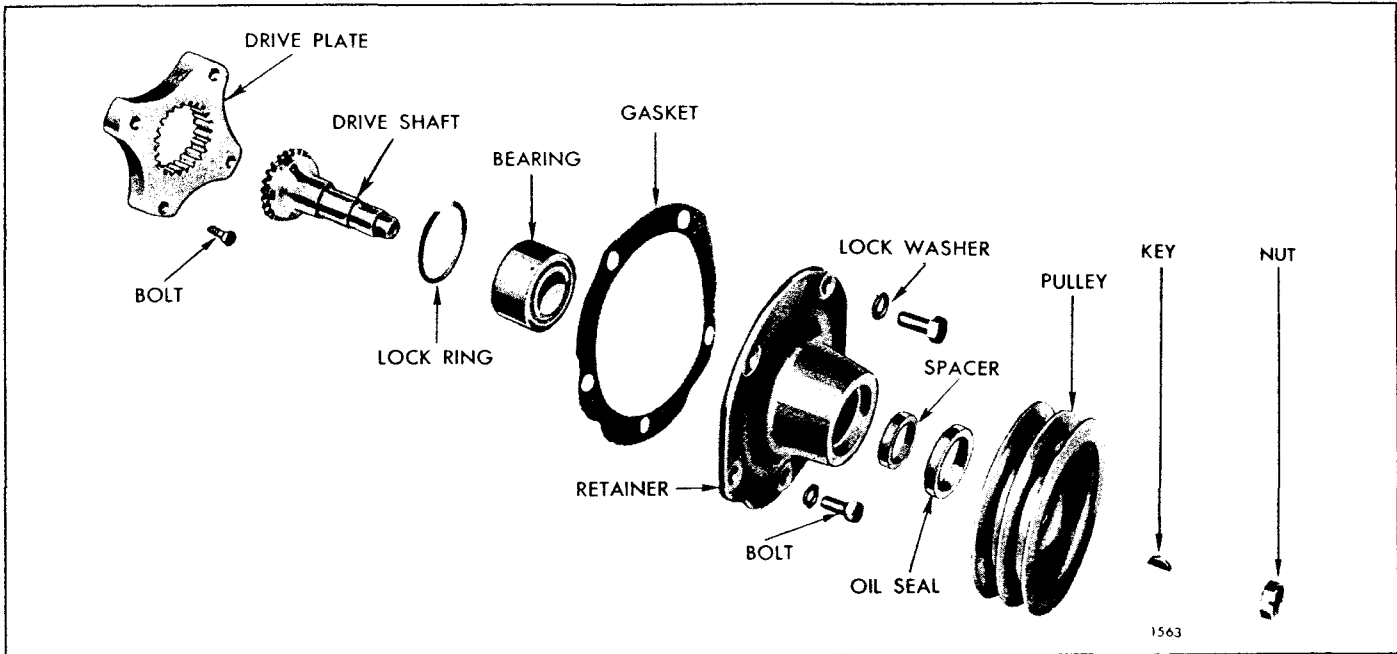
Components of Accessory Drive for Belt-Driven Accessory (Drive Plate Type)
